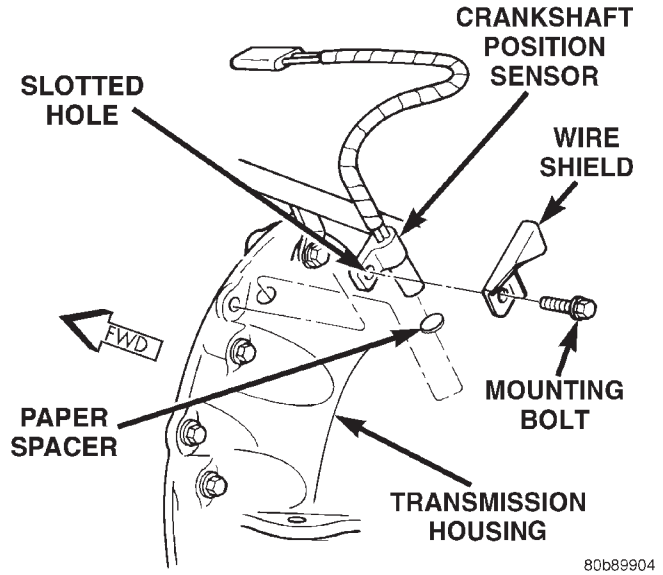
CKP Sensor—4.0L 6-Cylinder Engine
